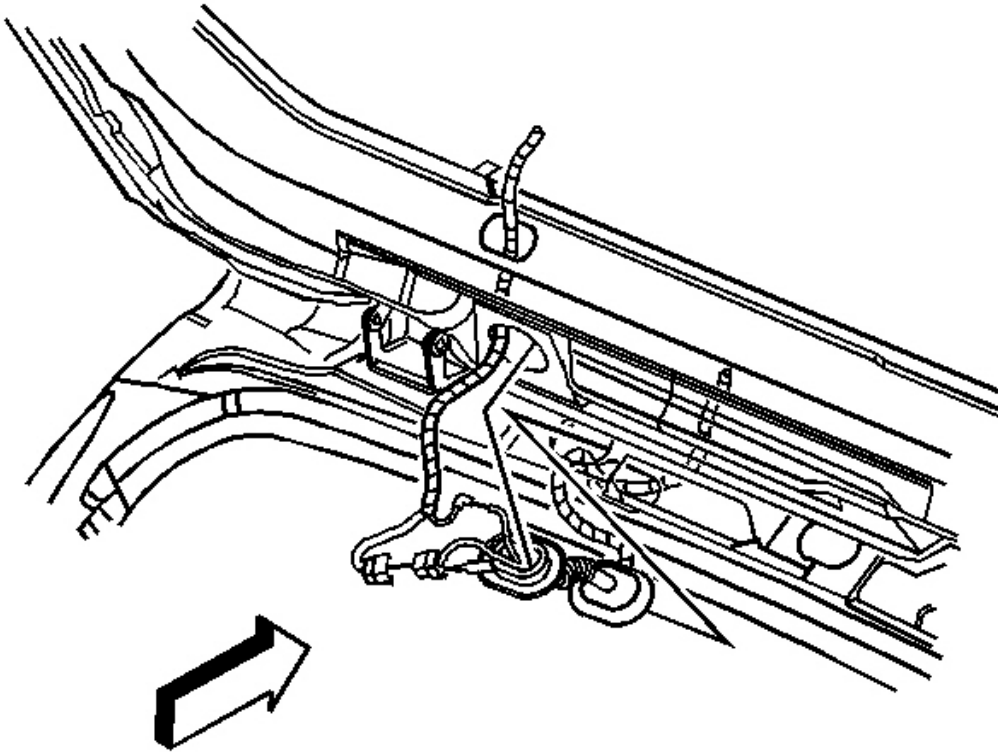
Identifying Wiring Harness Pass Through Boot To Liftgate
